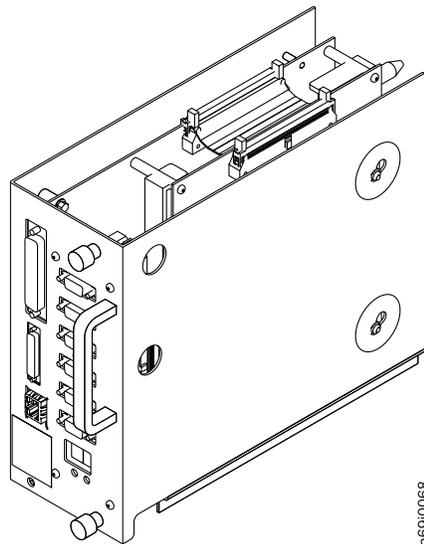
Components of the frame control assembly. Located at the right rear of the , this power structure comes with models L25, D25, L55, and D55. A model L52 frame is shown.
